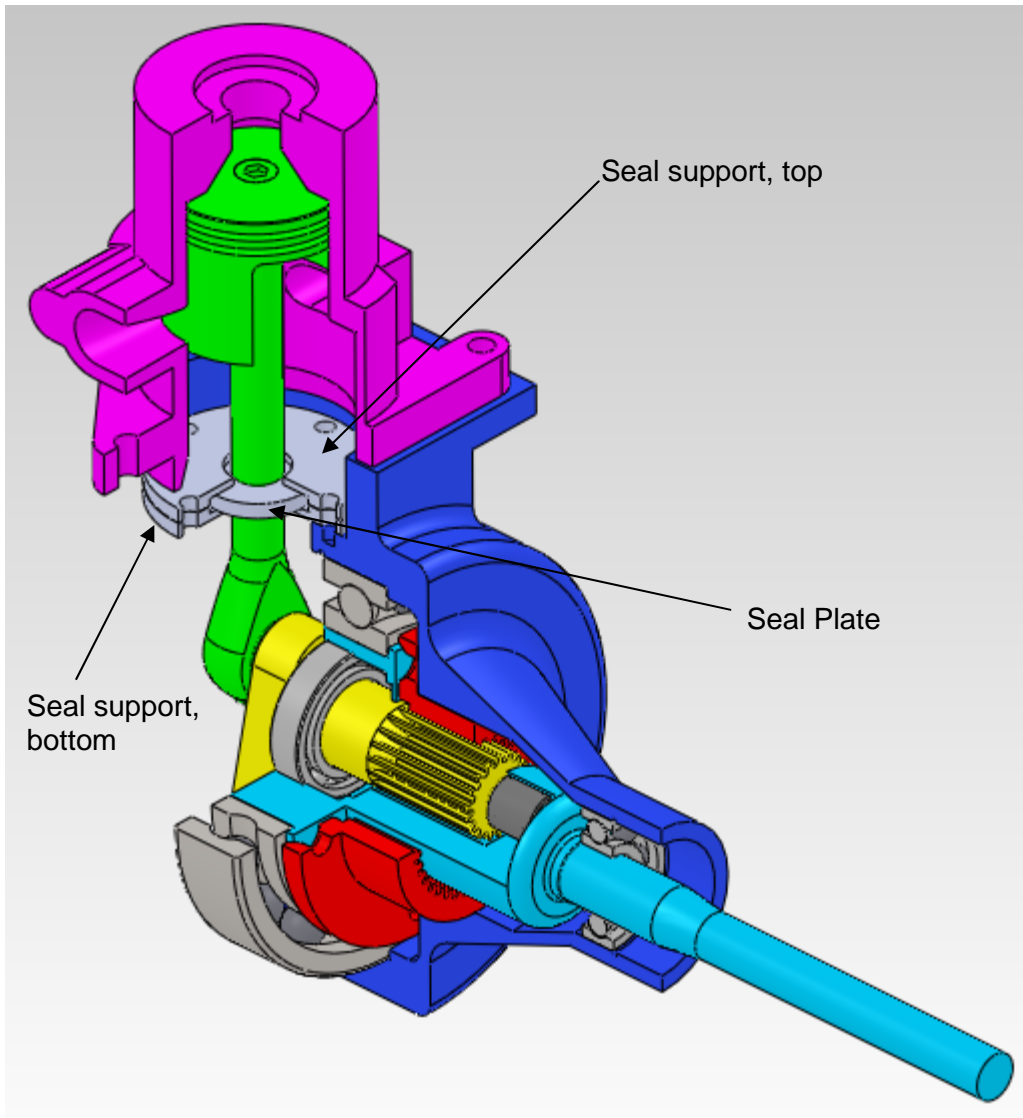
Connecting Rod Seal installed in Wiseman Engine
